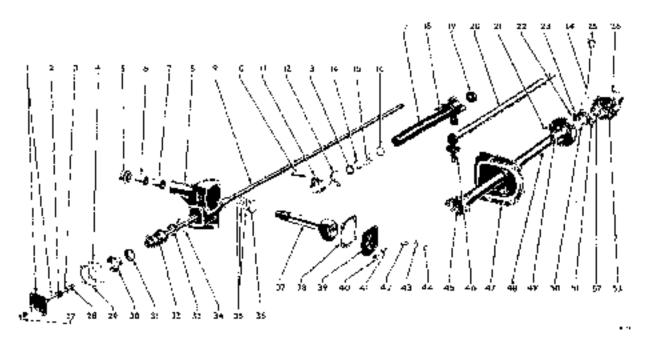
Steering Gent (Disassembled View) (1939 Model P8)
